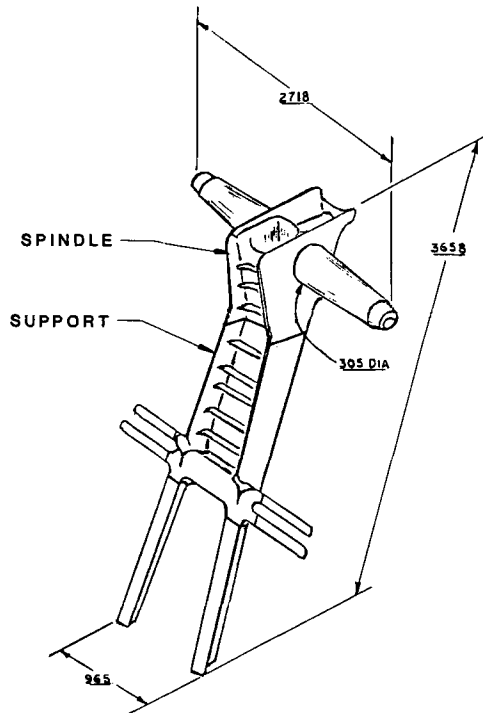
HP-9Ni-4Co-0.20C B1B Spindle and support forgings, dimensions in millimetres.
